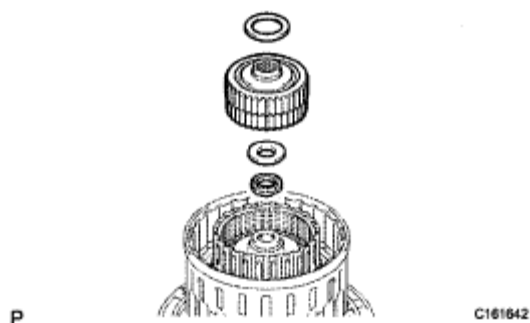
Identifying Needle Roller Bearing, Forward Clutch Hub And No. 3 Clutch Hub Thrust Washer
